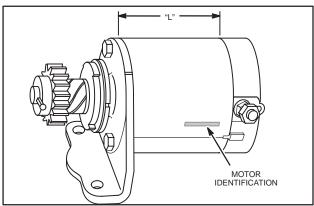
TYPICAL 12 VOLT DC STARTER MOTOR
